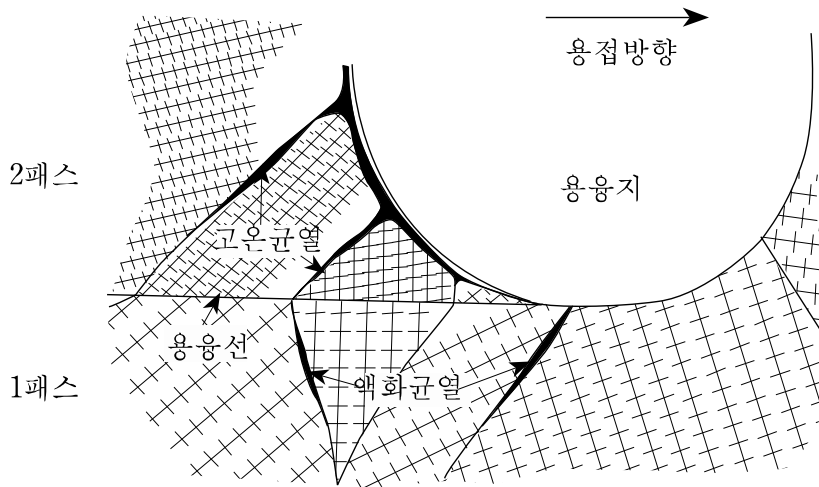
Solidification crack and welds liquation crack
